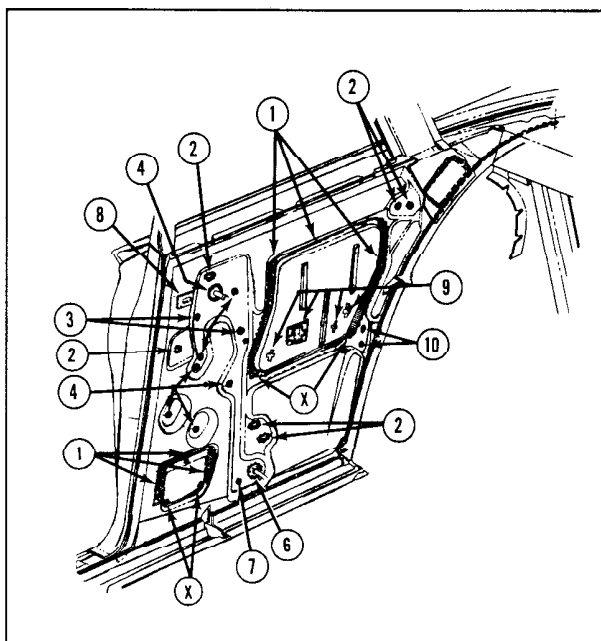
Inner Quarter Panel Sealing ("11" Styles)
